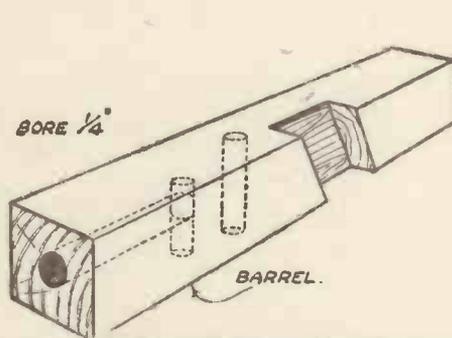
The Barrel should be Cut and Shaped as shown.
